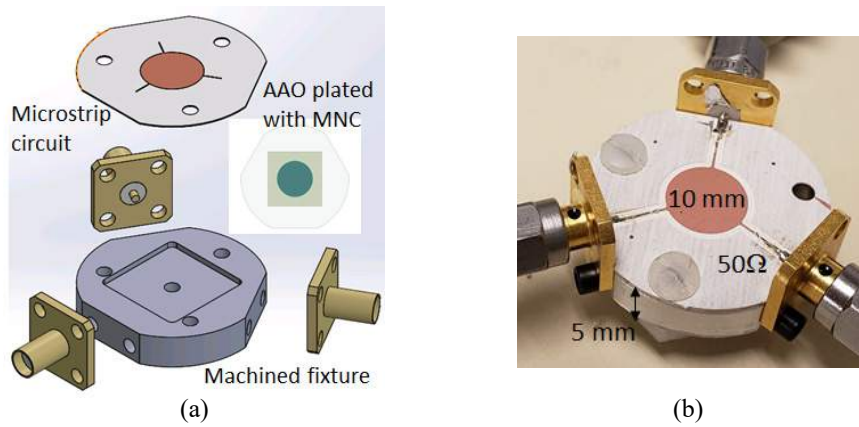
Fabricated microstrip circulator that operates around 7 GHz. (a) Assembly drawing and (b) prototype photograph.
